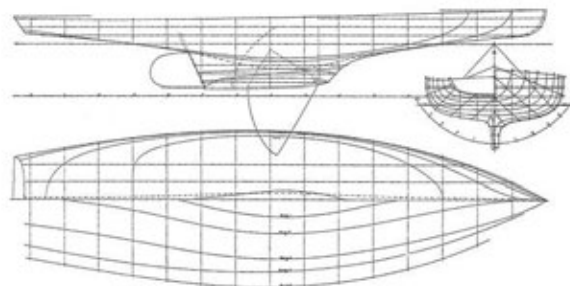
Construction Plan *The Small Yacht*, Design 12b
